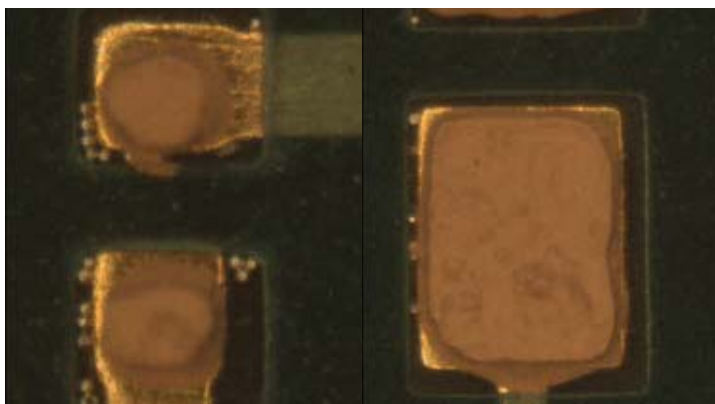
Images of pads exhibiting good coverage. Left: 01005 pad (0.4 mmX0.2 mm) Right: 0402 pad (1 mmX0.5 mm)
